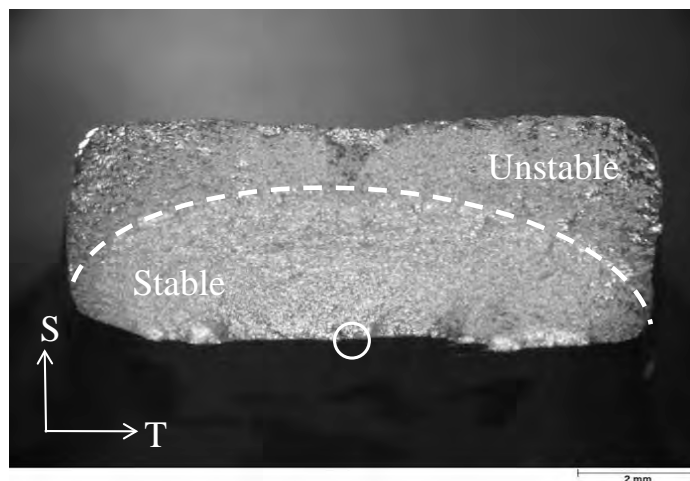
A 60° axial view of the fracture surface; failure after 135 cycles in L-direction (4 mm sheet),  $\Delta\epsilon=0.0275$ . The lower small circle indicates the crack initiation site
